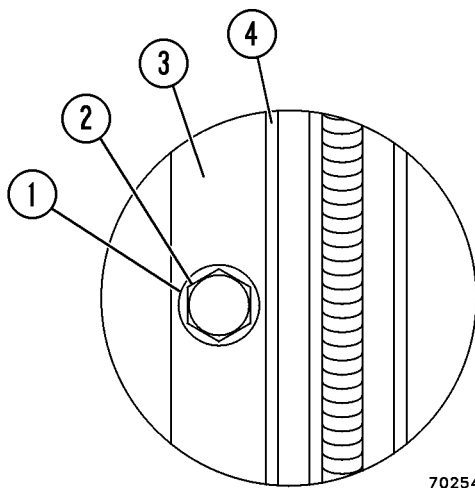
DOOR JAMB BOLT ADJUSTMENT
